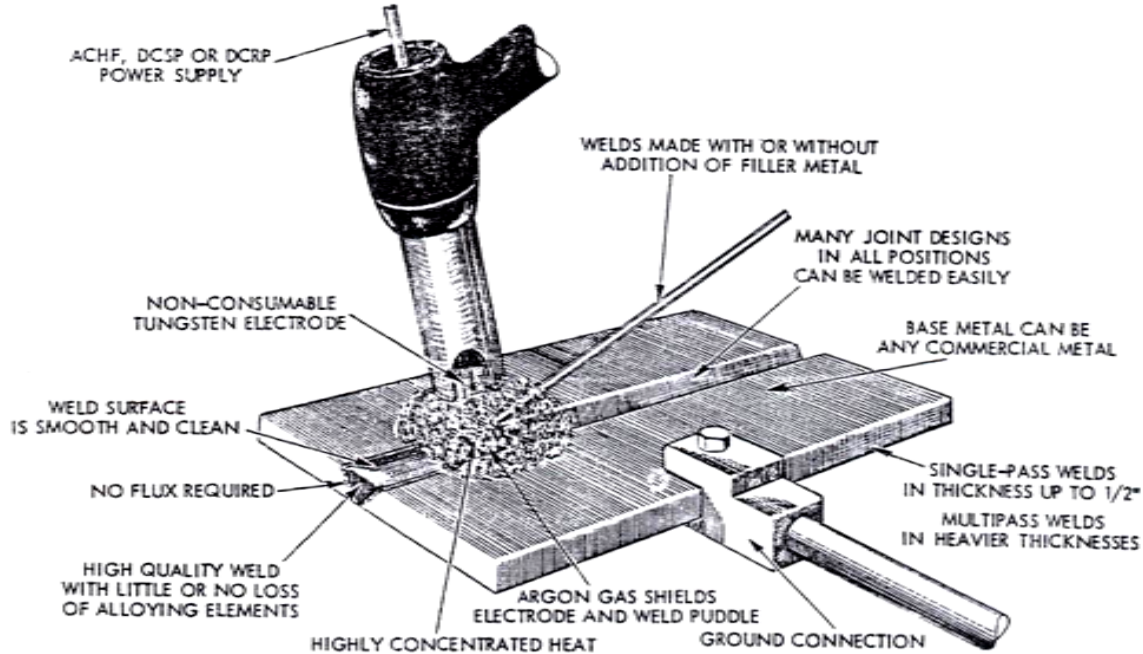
In TIG welding, a non-consumable tungsten electrode is used. It is surrounded by a shield of inert gas. (Linde Co.)
